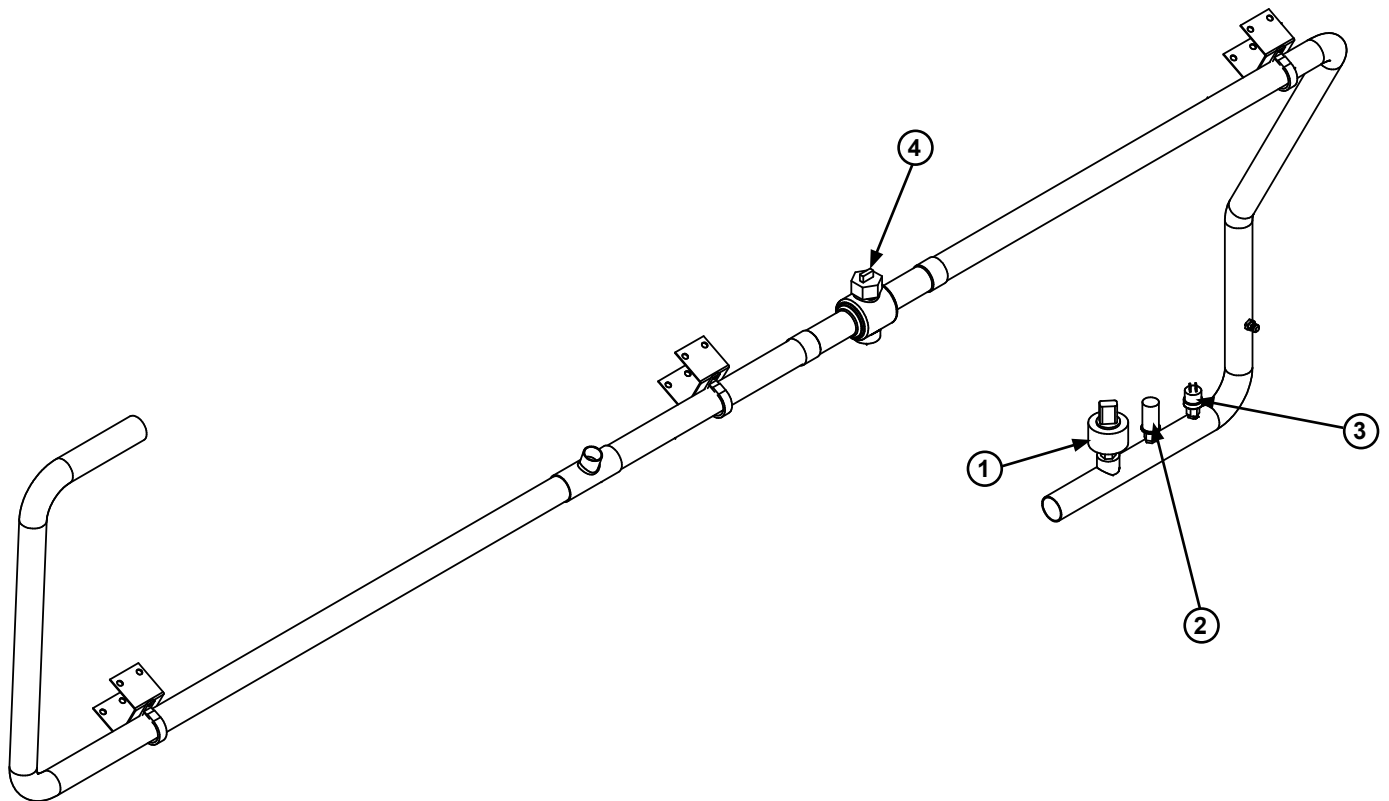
REFRIGERANT PIPING ASSEMBLIES
